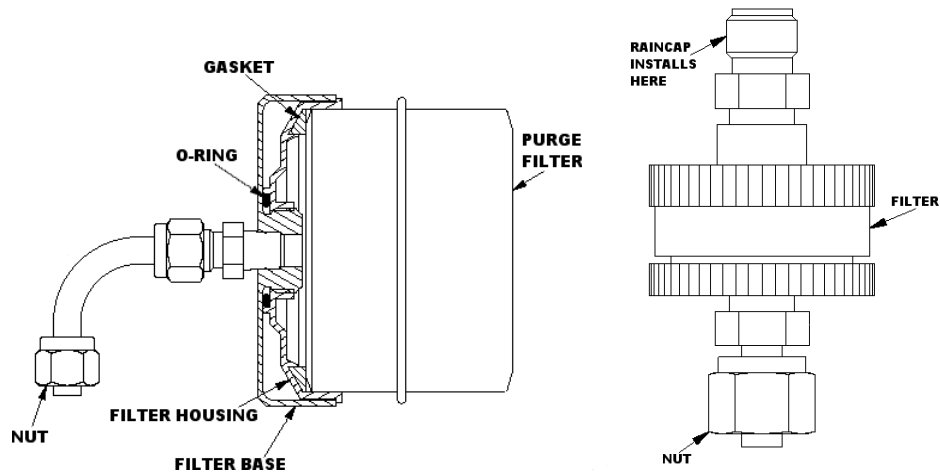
, Purge Filter and Intake Particulate Filter Assemblies
